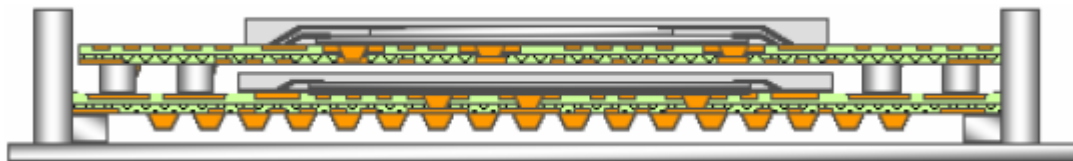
Fixture maintains μ PILR package alignment during joining process.
